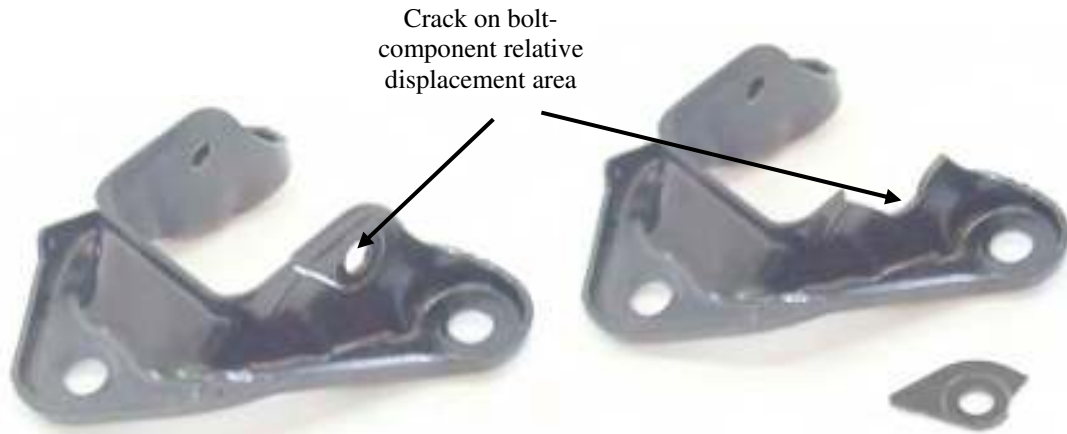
Suspension component damaged by fretting fatigue [Minho Univ.].
